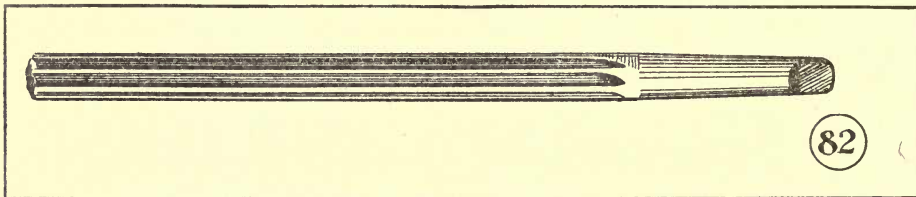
Steering bracket bushing reamer which is used for reaming the starting crank bushing
